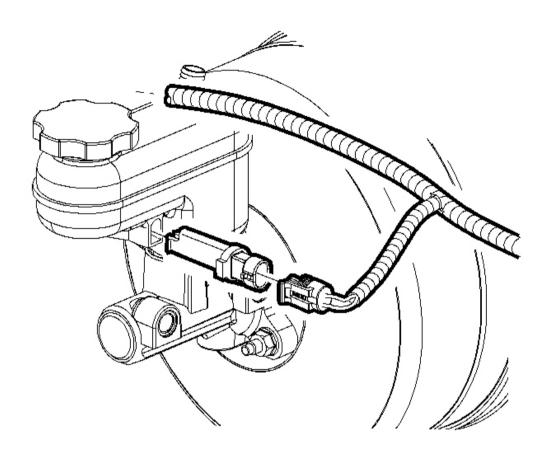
Removing/Installing Brake Fluid Level Sensor Courtesy of GENERAL MOTORS CORP.
